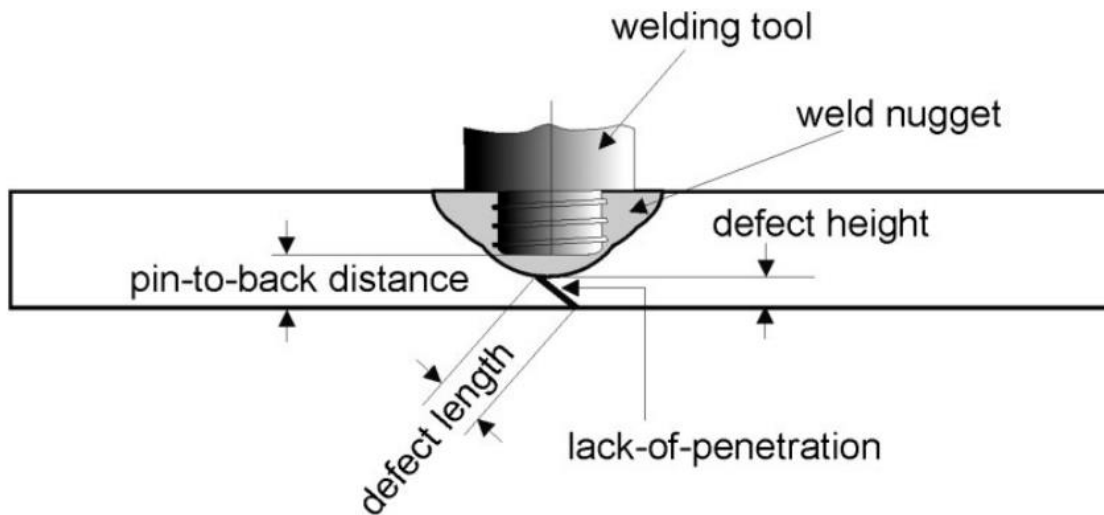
Schematic Diagram representing the Penetration of the Pin and the Formation of LOP during Friction Stir Welding
